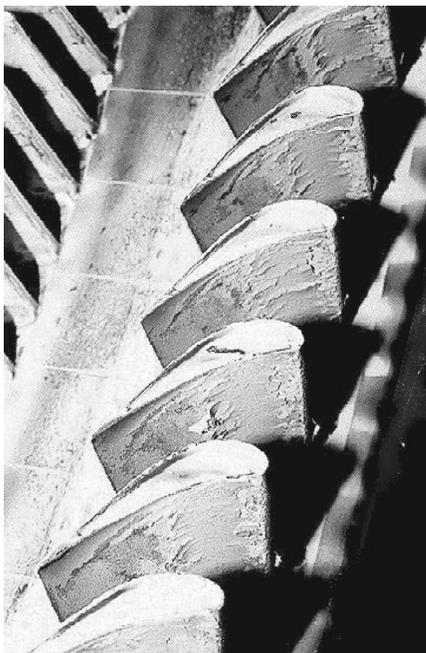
Gas Turbine Operating on Heavy Fuel, Showing Blading Fouled with Ash Deposits.
